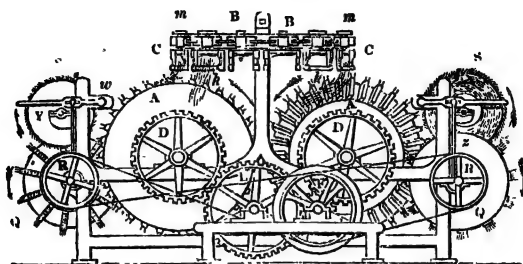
Section of Wordsworth's Flax-heckling Machine.
